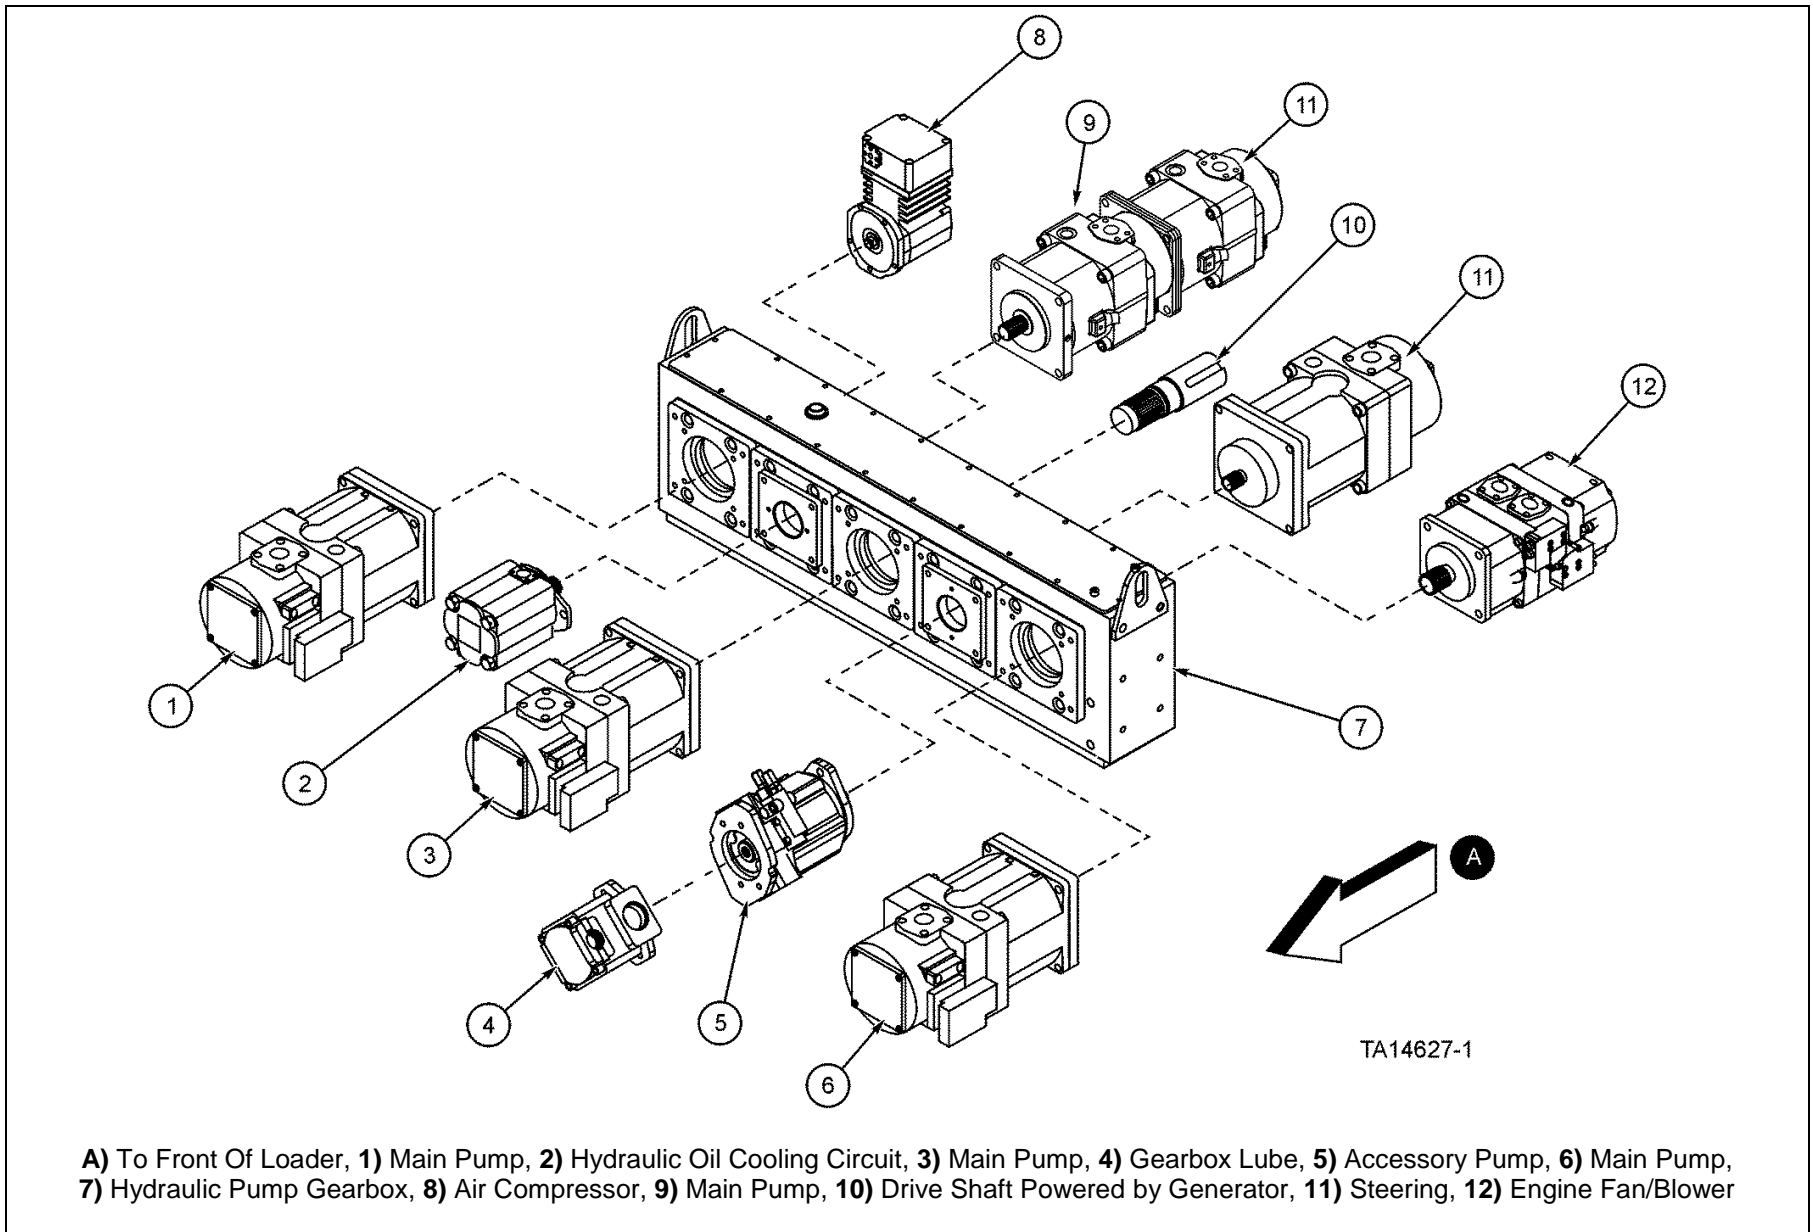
L-2350 Hydraulic pump arrangement for 8 blade engine fan (typical pump types are illustrated)
